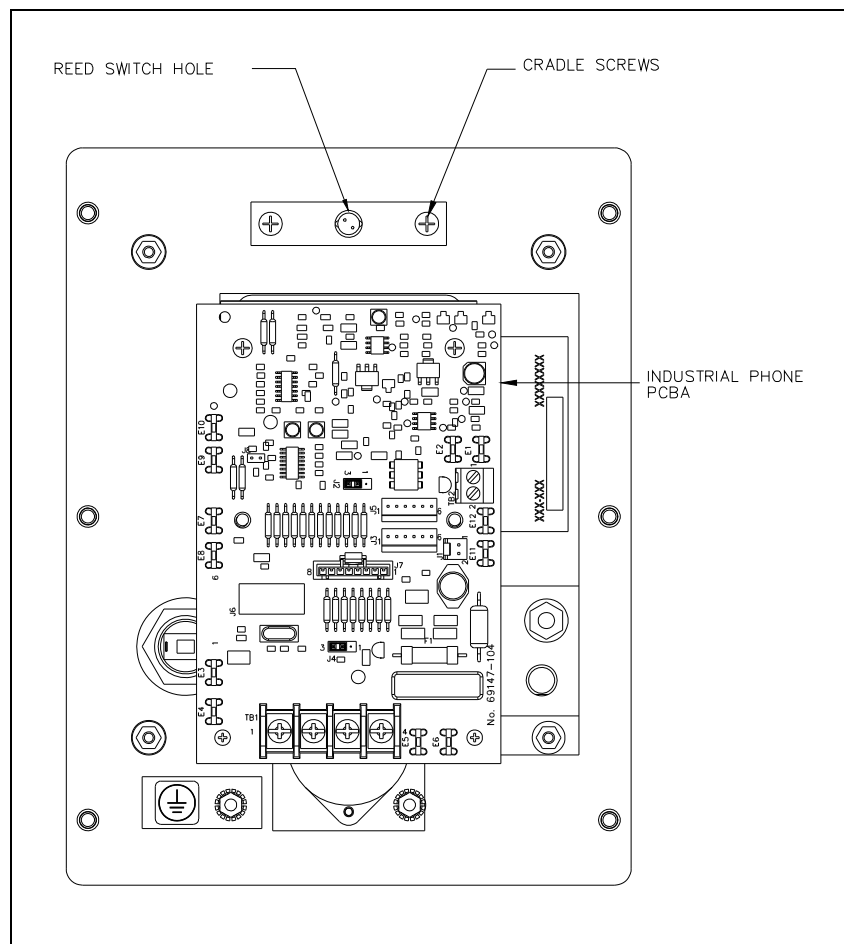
Models 27x-001BH Series—Front Panel Assembly—Interior View
